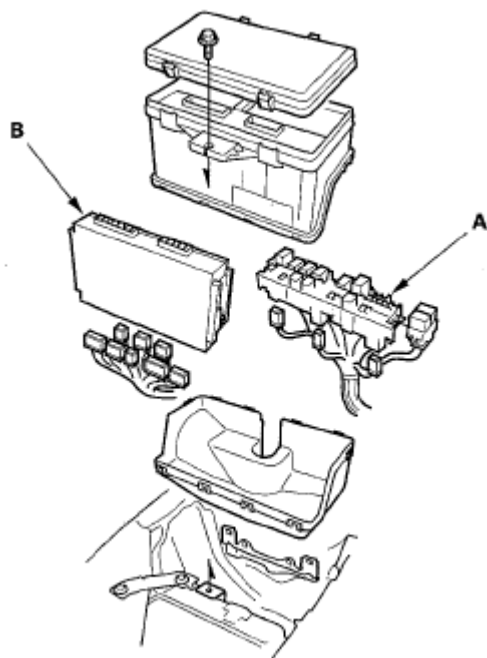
Identifying Under-Hood Fuse/Relay Box Relay Block Part And Relay Control Module Part
